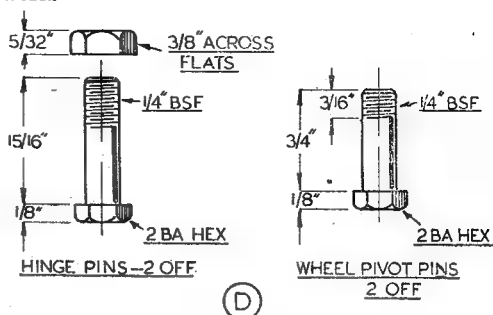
Left—the arm hinge pins. Right—the wheel pivot pins
